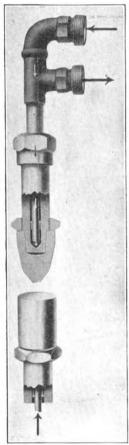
Water-Cooled Die Point Courtesy of Toledo Electric Welder Company
